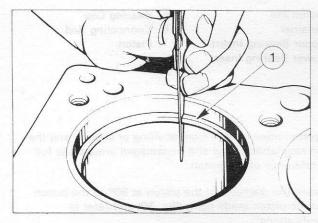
Checking Piston Ring Gap in Cylinder Bore
